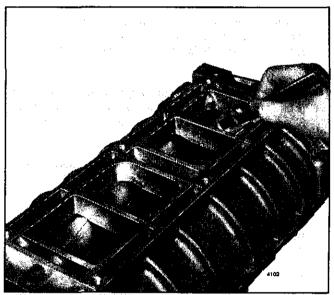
Measuring End Clearance Between Blower Rotors and End Plate
